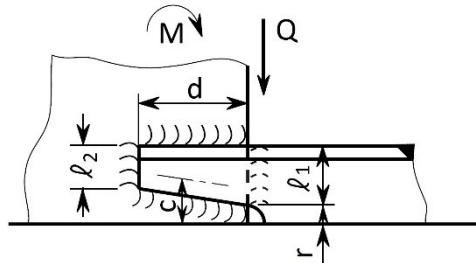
Profile joined by means of two flank and two frontal fillet welds (all round welding)
